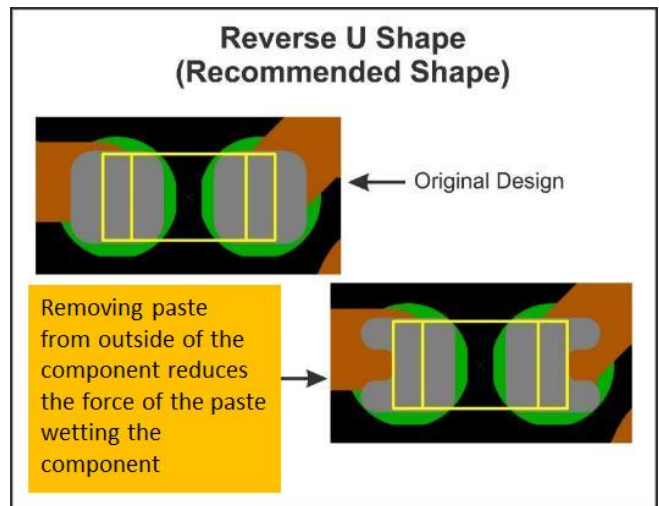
Explanation of the Reverse U-Shape Stencil Design.
